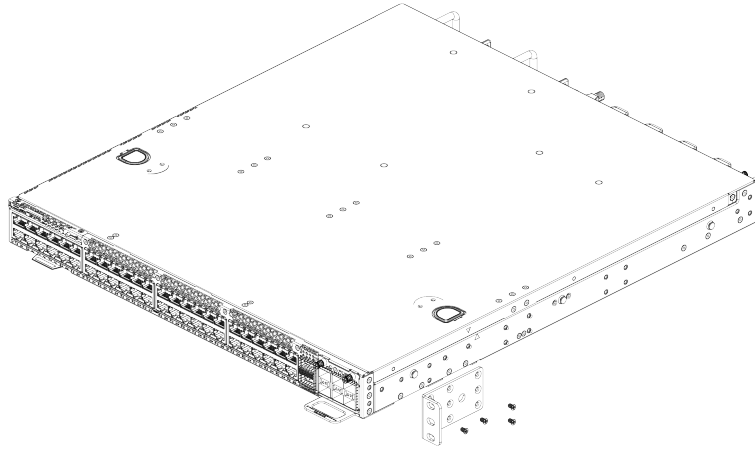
Attaching a Short Mounting Bracket (Ear): Front of Switch
